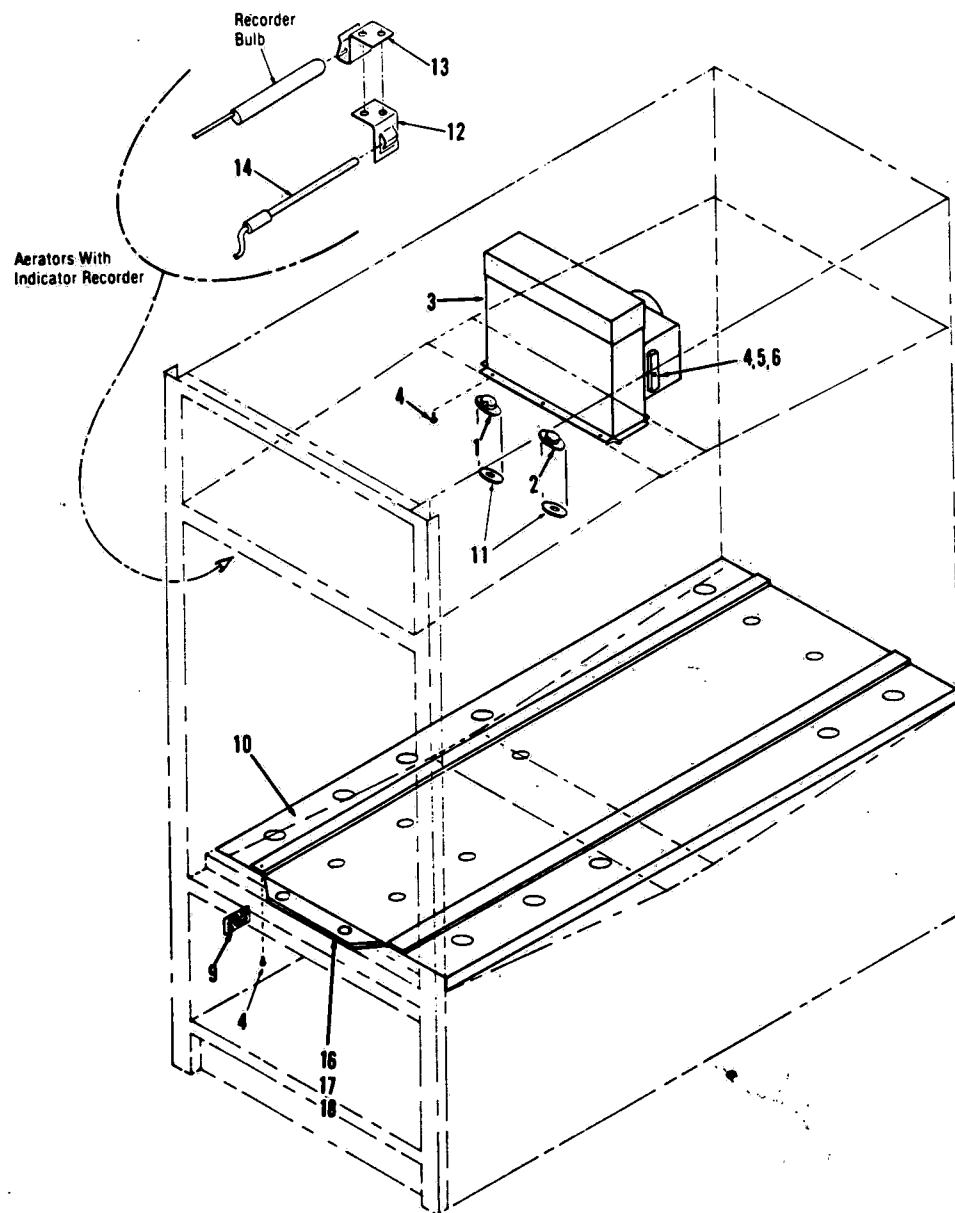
CHAMBER ASSEMBLIES, Medium Aerator.
